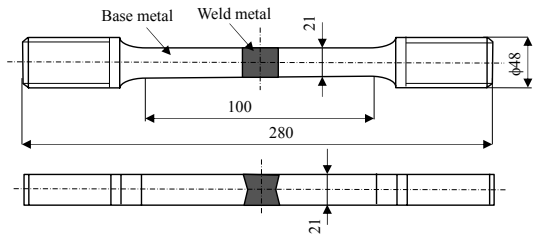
Shape of creep test specimen for large-welded joint of ASME Gr. 91 steel.
